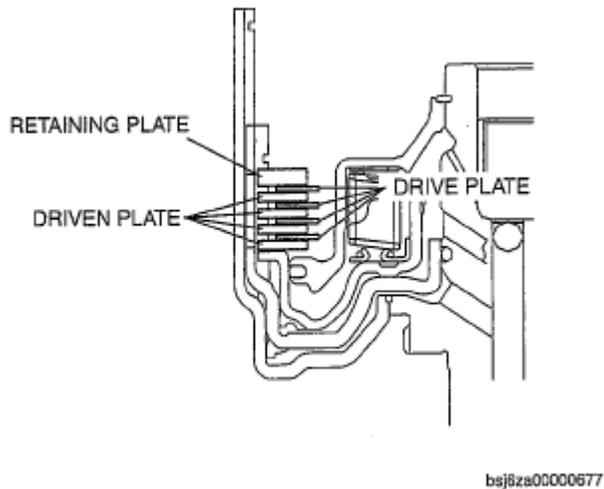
Identifying Retaining Plate, Driven And Drive Plate
